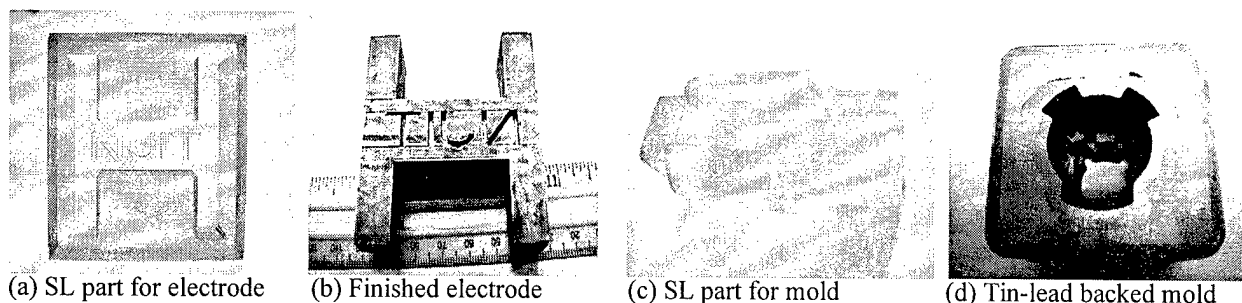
Electroformed electrode and Mold generated by the tooling process.
